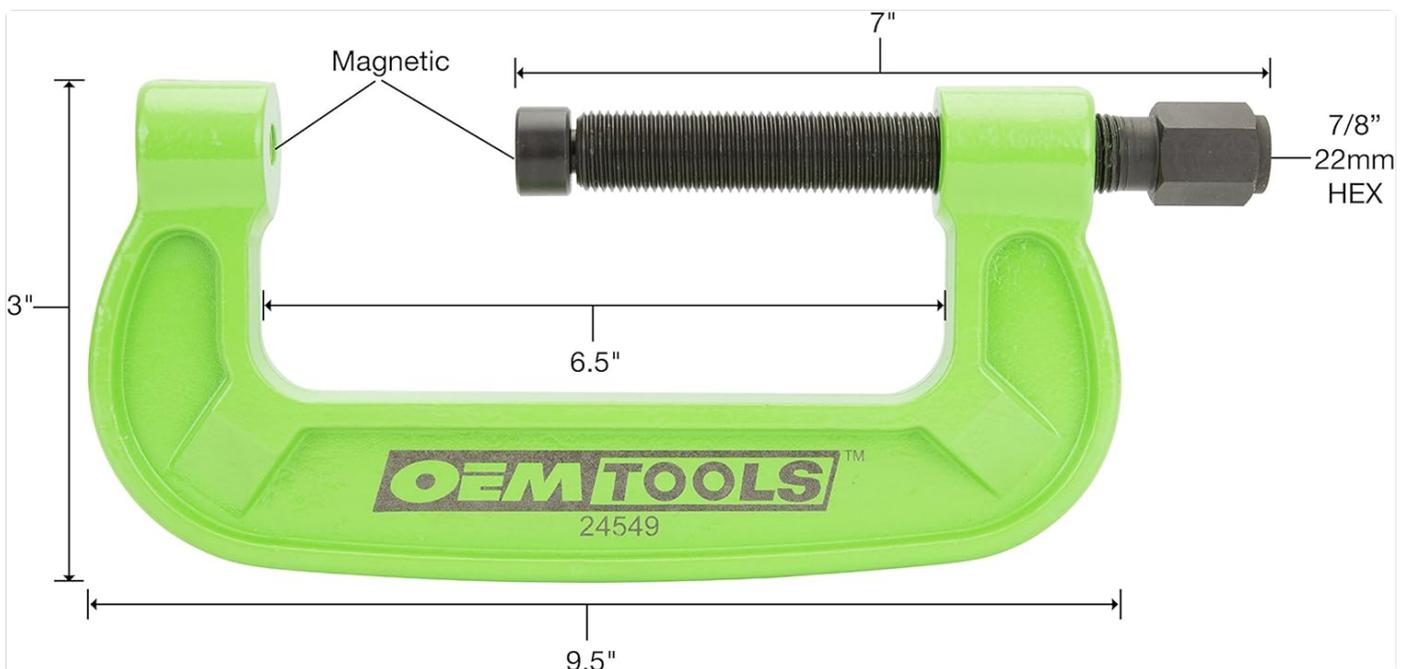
OEMTOOLS 24549 Automotive Bearing Cup Installer. This image shows the complete tool, highlighting its robust C-clamp design and threaded forcing bolt.
